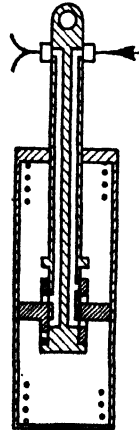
JACK WITH DELAYED AUTOMATIC REVERSING VALVE ARRANGEMENT
